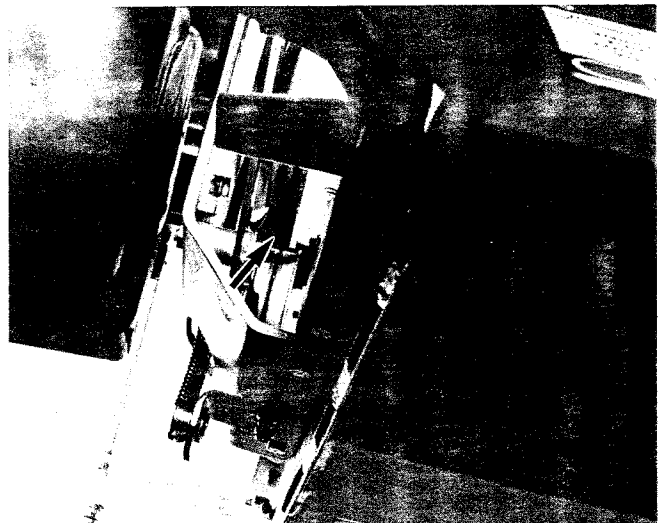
Remove belt cover held in place by two bolts and locknuts. The lower pulley and belt are behind it.
